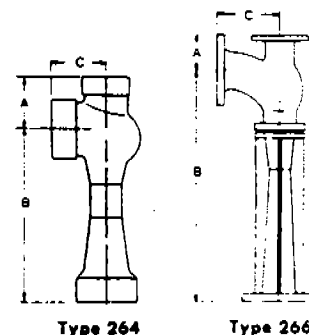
TYPE 266 EDUCTOR. These eductors are similar to Type 264 Eductors except that they have flanged connections and removable throat bushings along with removable nozzles. They are supplied in cast iron, bronze-mounted in 4" and 6" sizes. Other materials can be supplied on special order.
